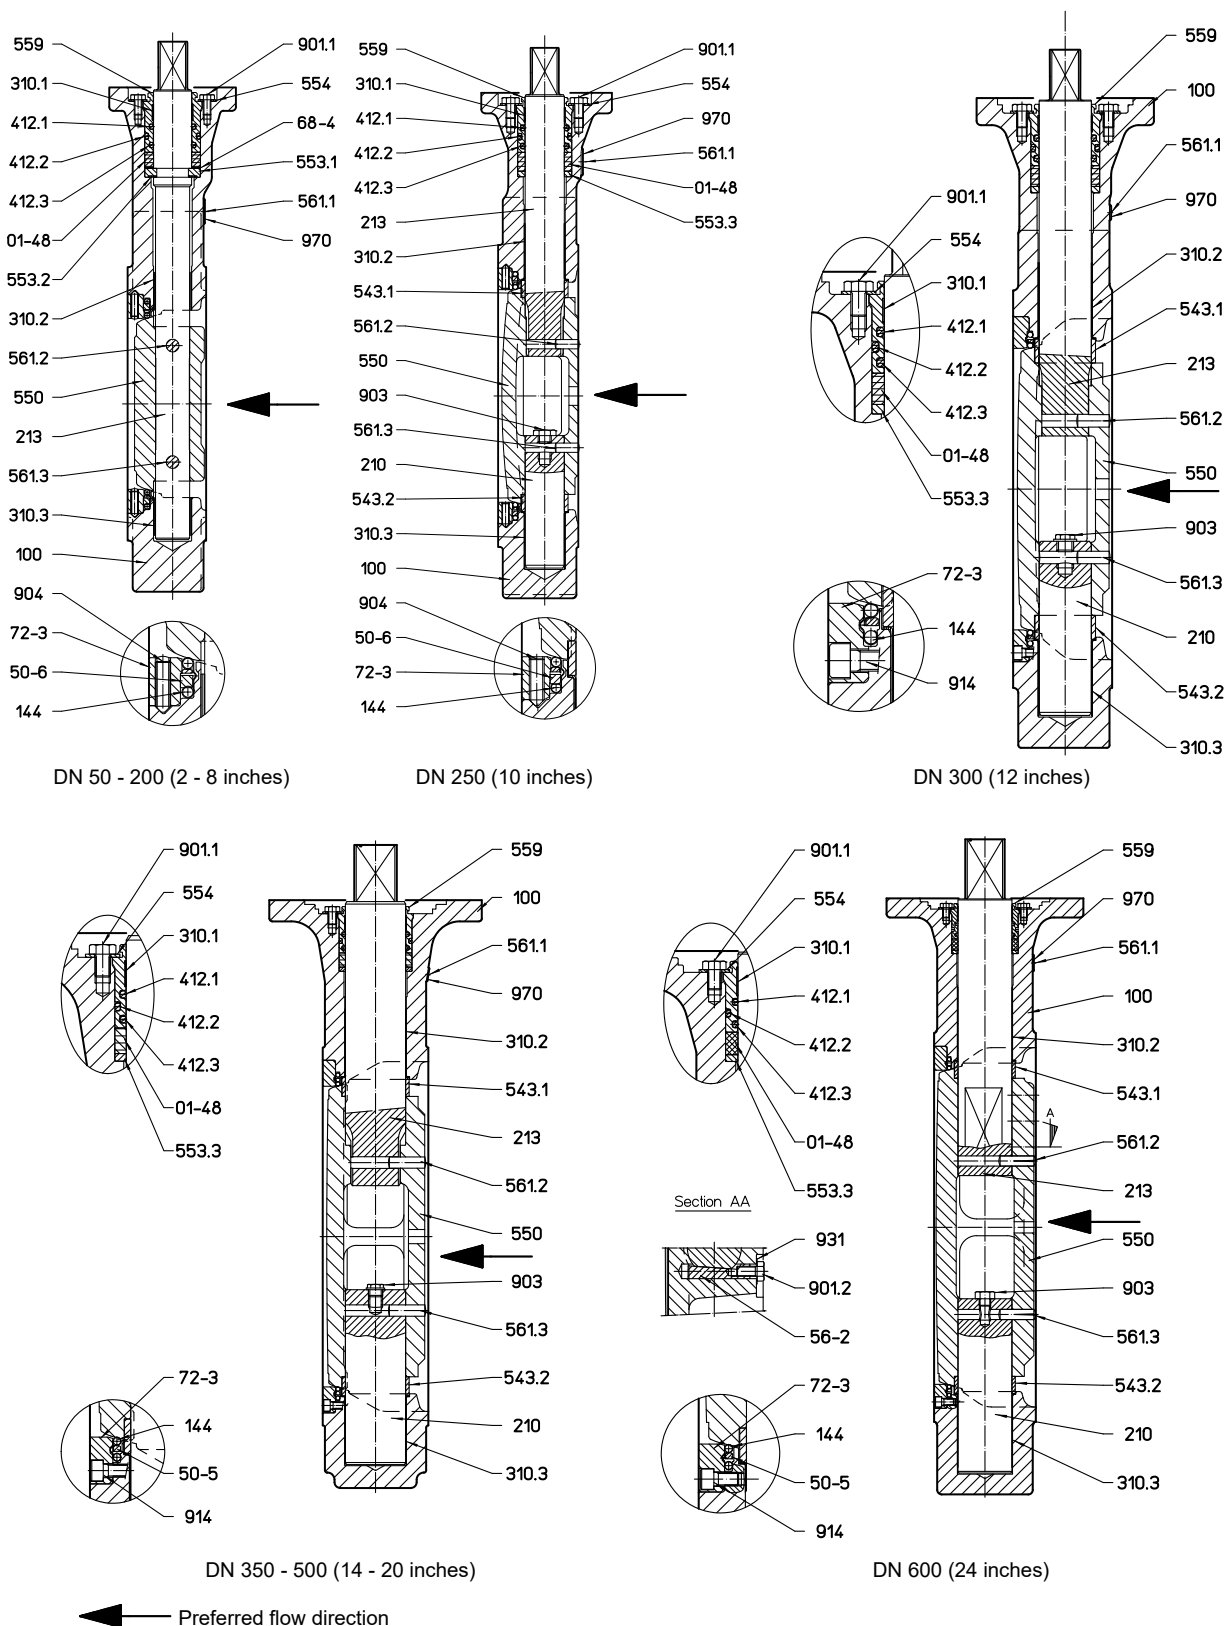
Sectional drawing of DANAIS MT II DN 50 - 600 (2 - 24 inches) / wafer-type body (T1) and full-lug body (T4) / metal design
